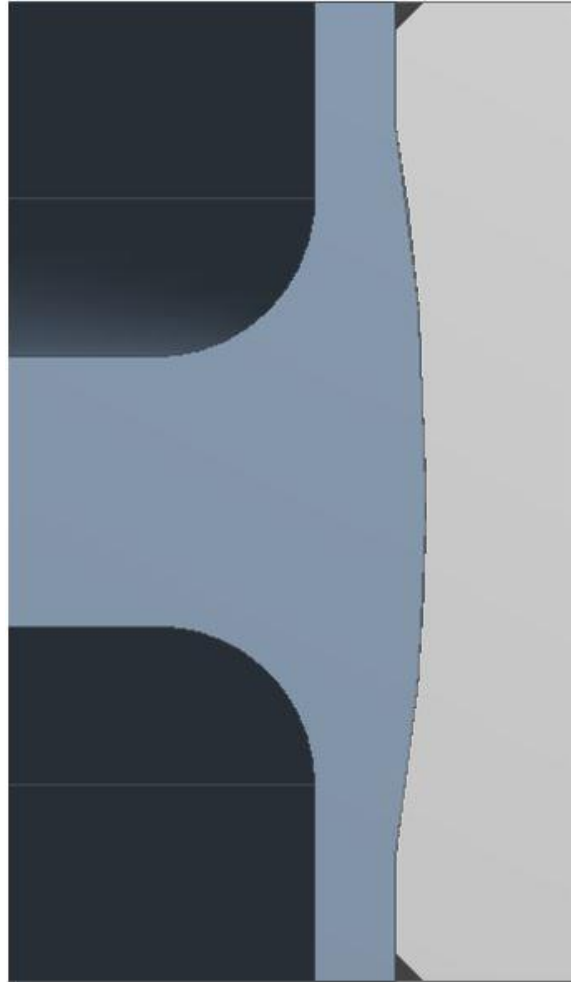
Detail cross sectional view of outer interface highlighting protrusion/indentation of hybrid gear with mechanical interlock concept.
